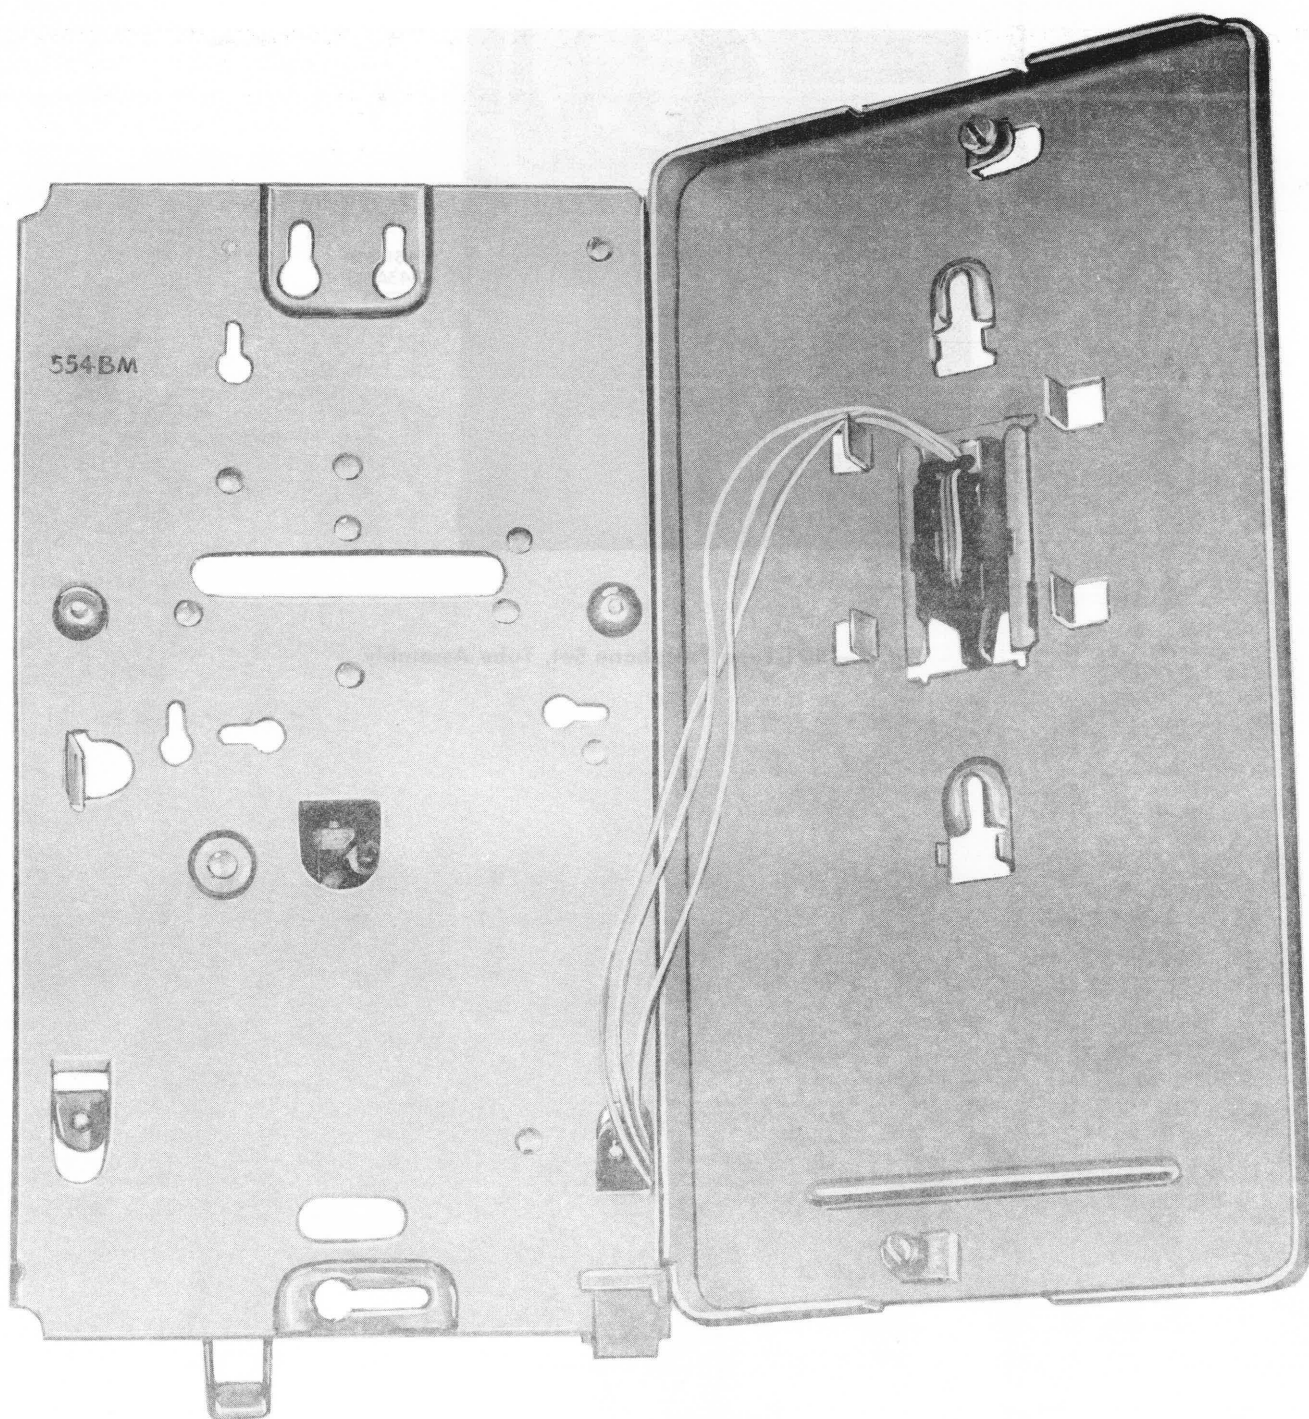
228B Adapter With 523A-Type Plug, Showing Recommended Lead Routing
